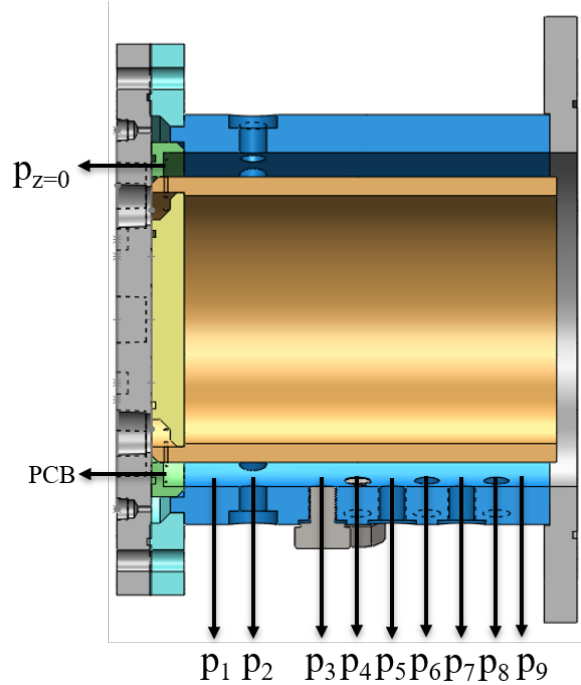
Location of static pressure sensors for 154-mm RDE.
